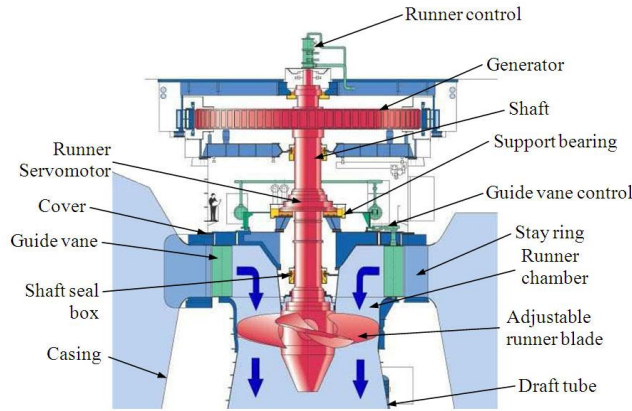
Complete Assembly of Kaplan Turbine [2]
